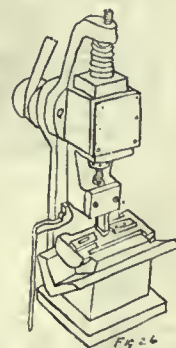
A FILE CUTTER CONVERTED INTO A MARKING MACHINE.
